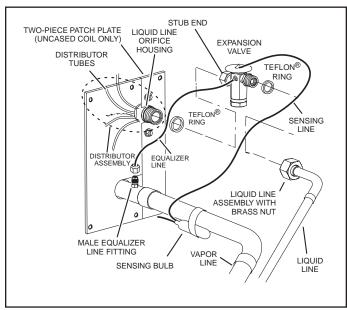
Remove Expansion Valve (Uncased Coil Shown)
